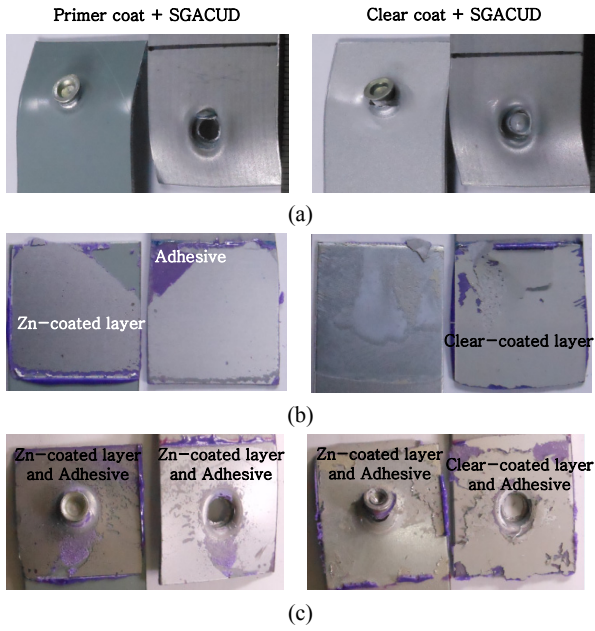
Fracture mode images of (a) SPR (b) Adhesive bonding and (c) Hybrid joining
